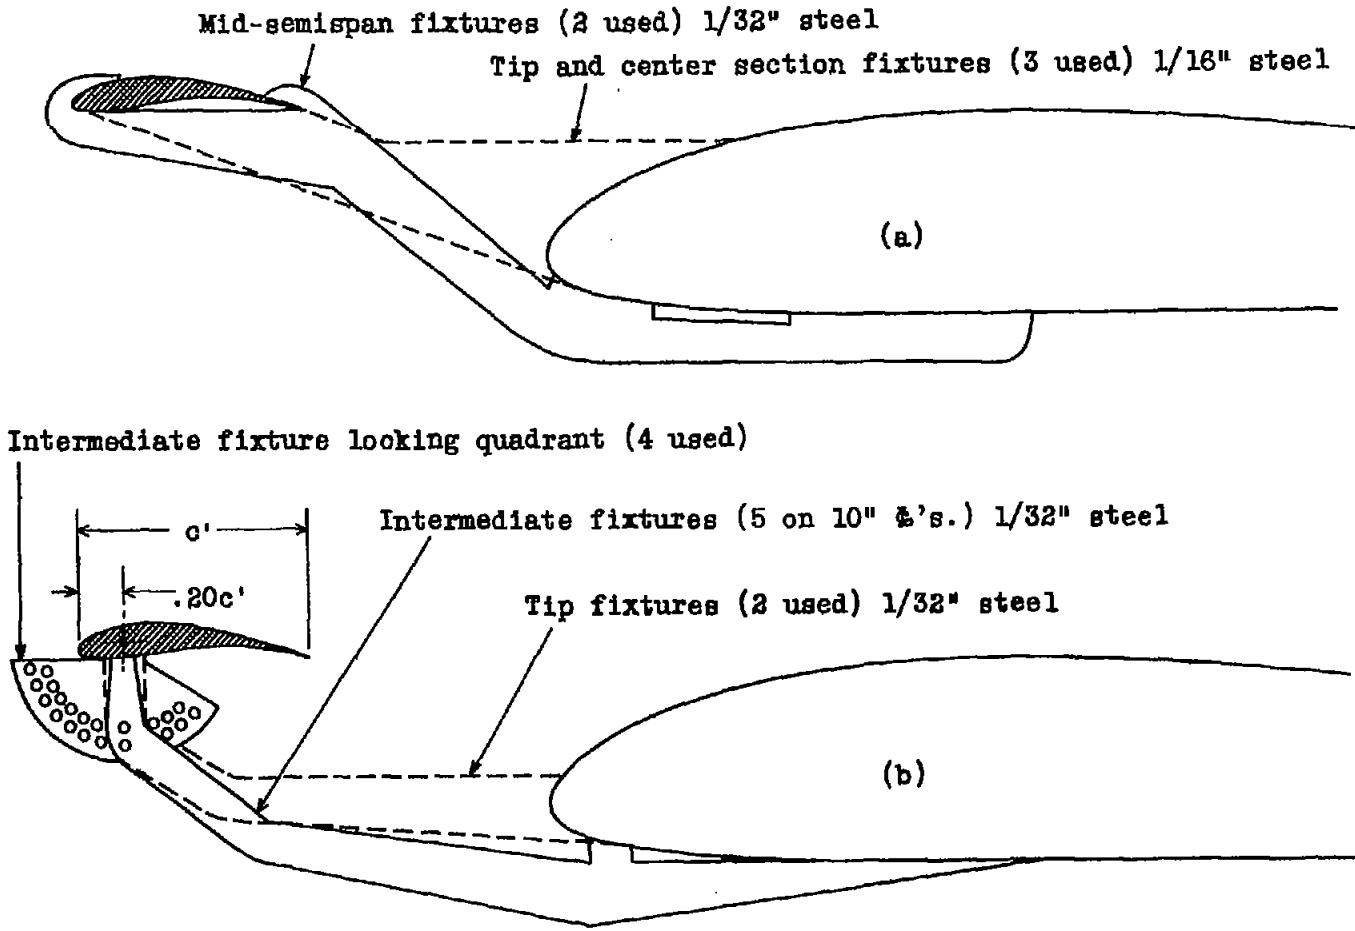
Auxiliary airfoil mounting fixtures. (a) fixed auxiliary. (b) movable auxiliary.
